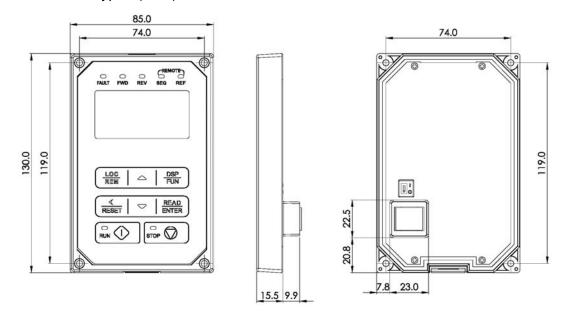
Dimensions of LCD keypad (IP55)
